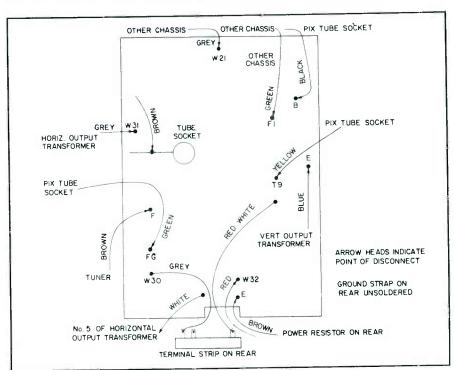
Sketch of Connections Linking Printed Board with Metal Chassis.
